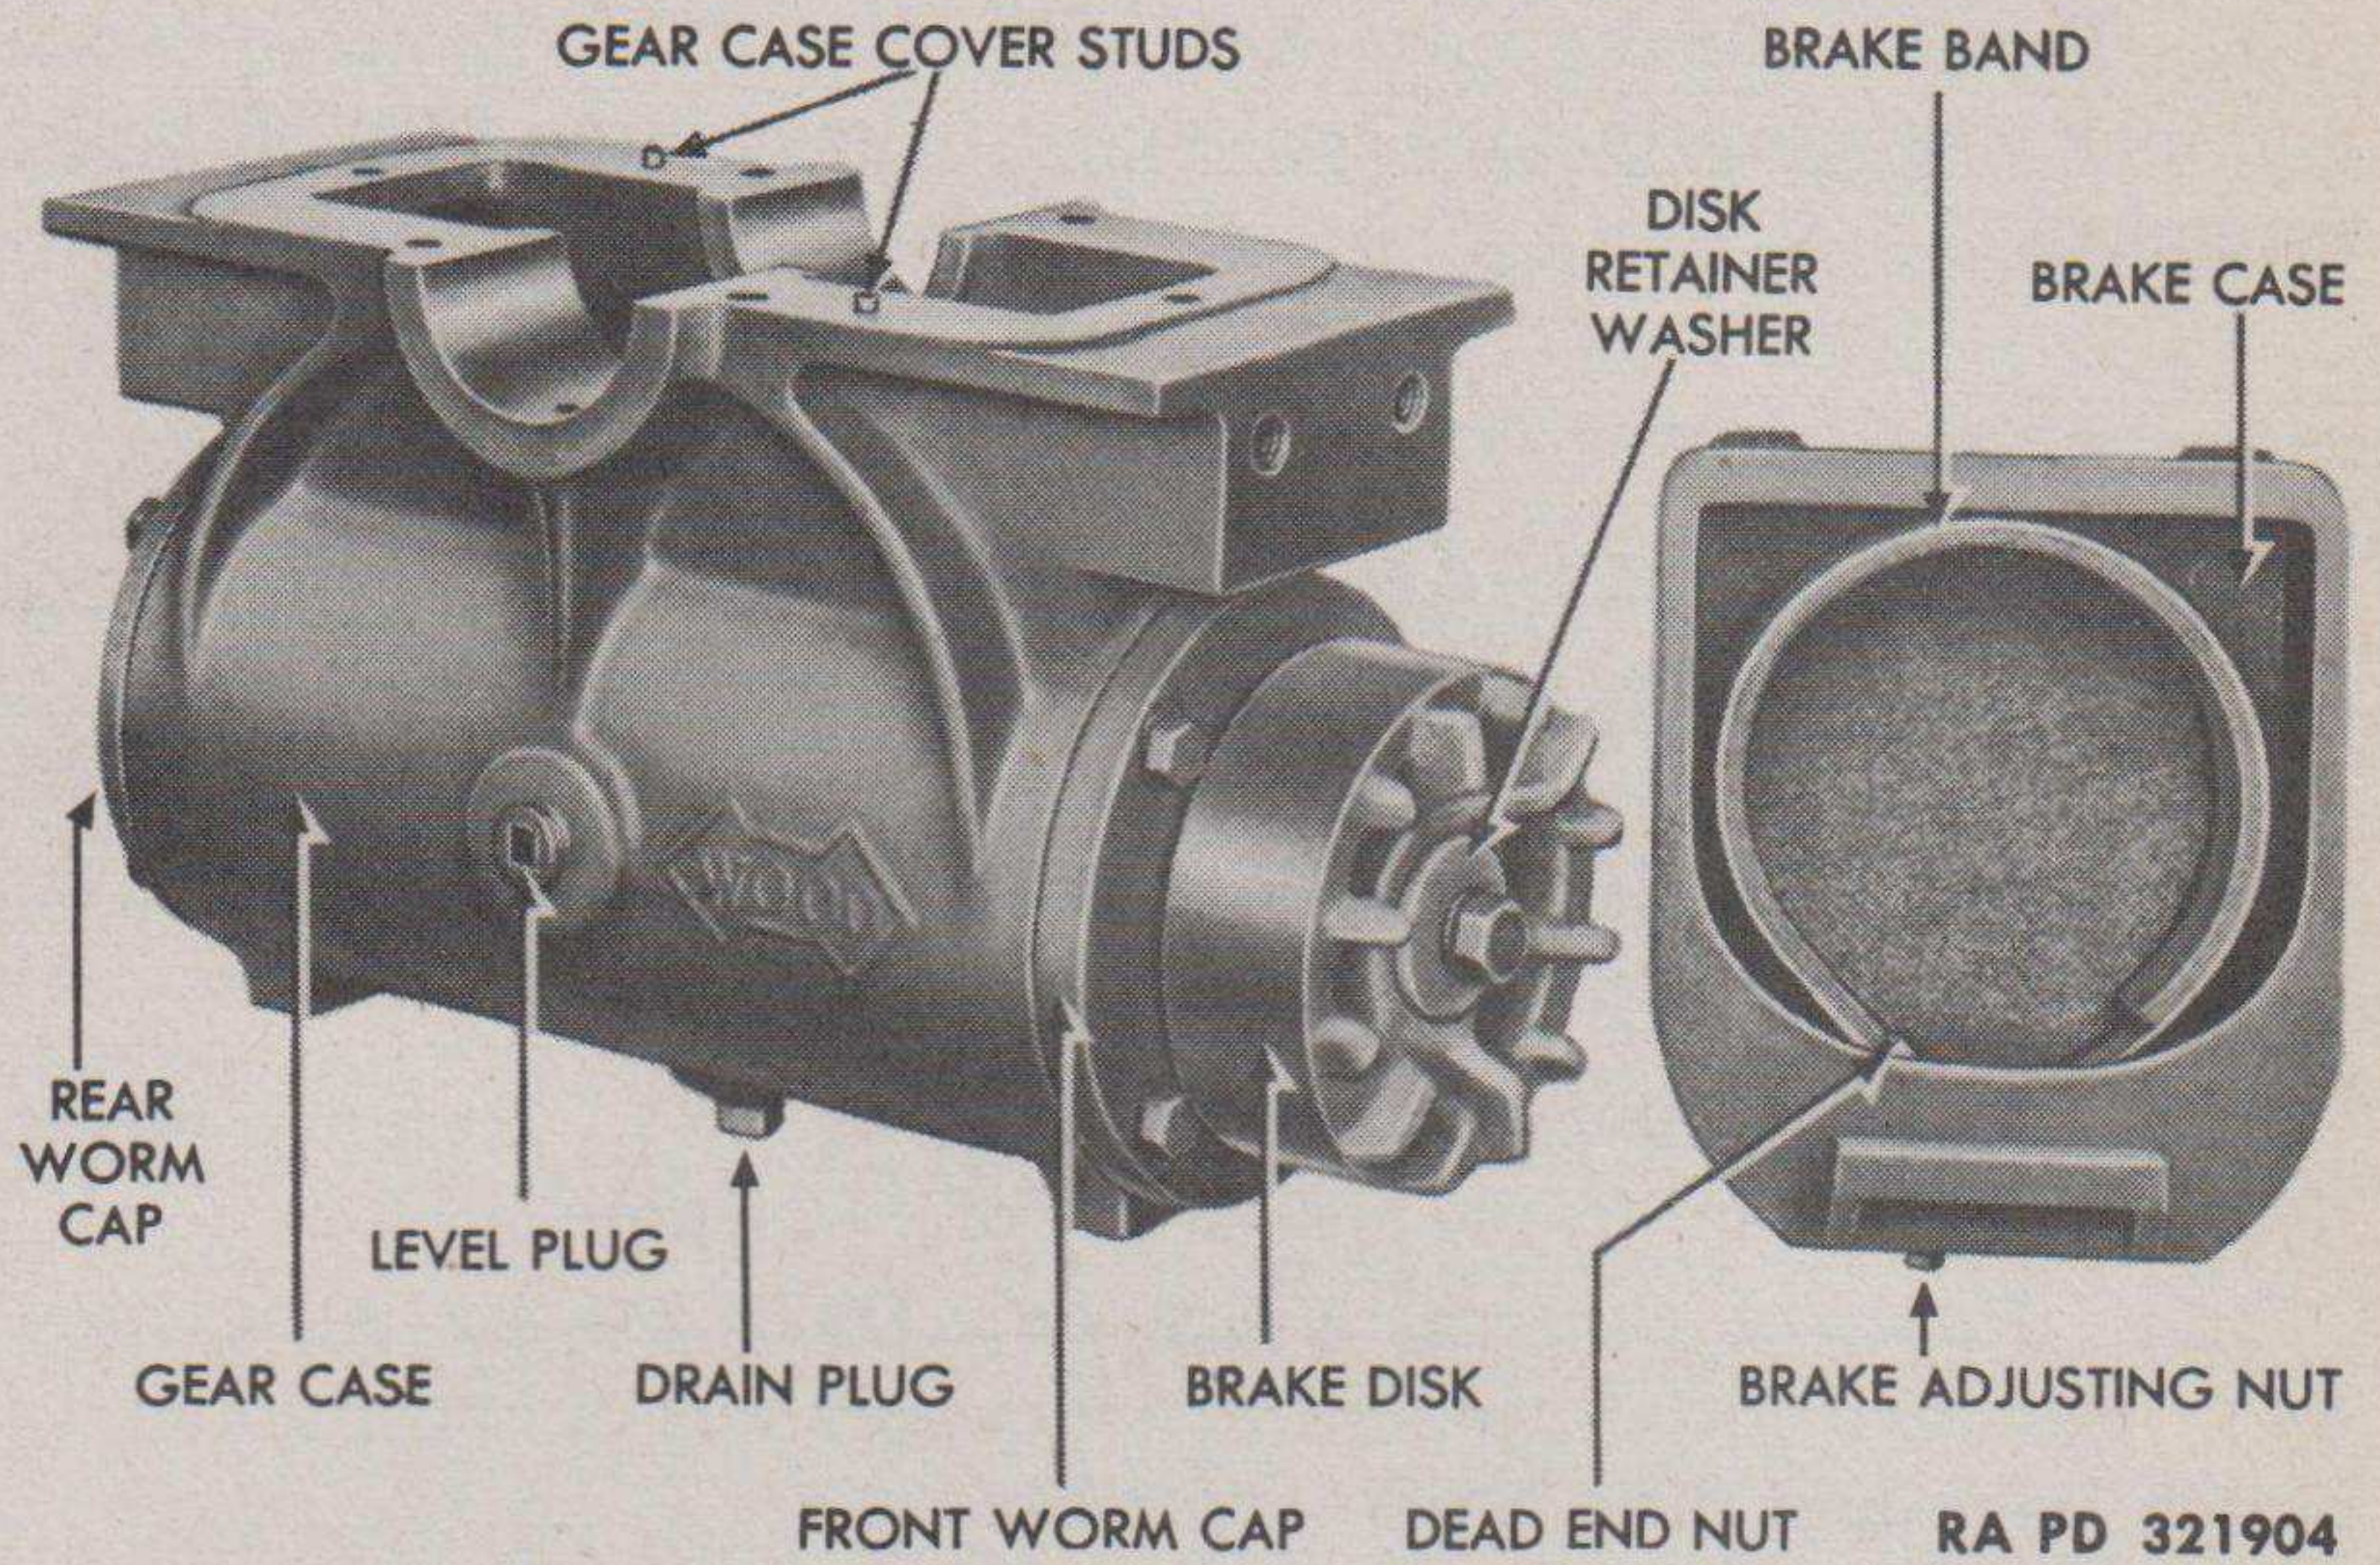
Winch Gear Case Assembly — Brake Case Removed
